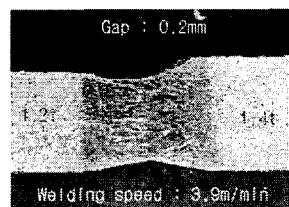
Butt weld cross section for 0.2mm gap
